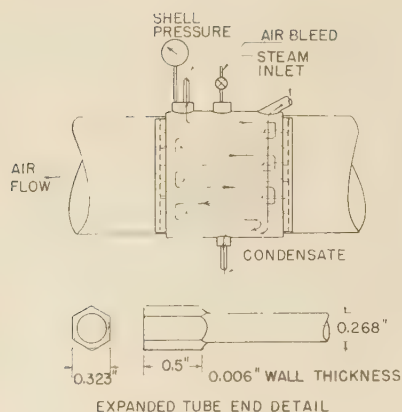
SHELL-SIDE STEAM FLOW AND EXPANDED-TUBE-END DETAIL
